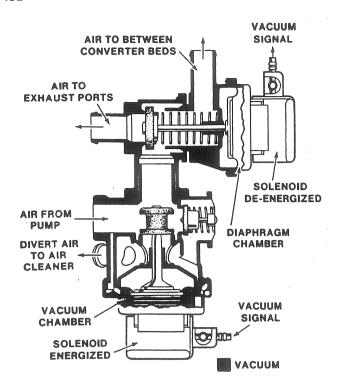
EDES valve directing air to the exhaust ports. (Courtesy of General Motors Corp.)
